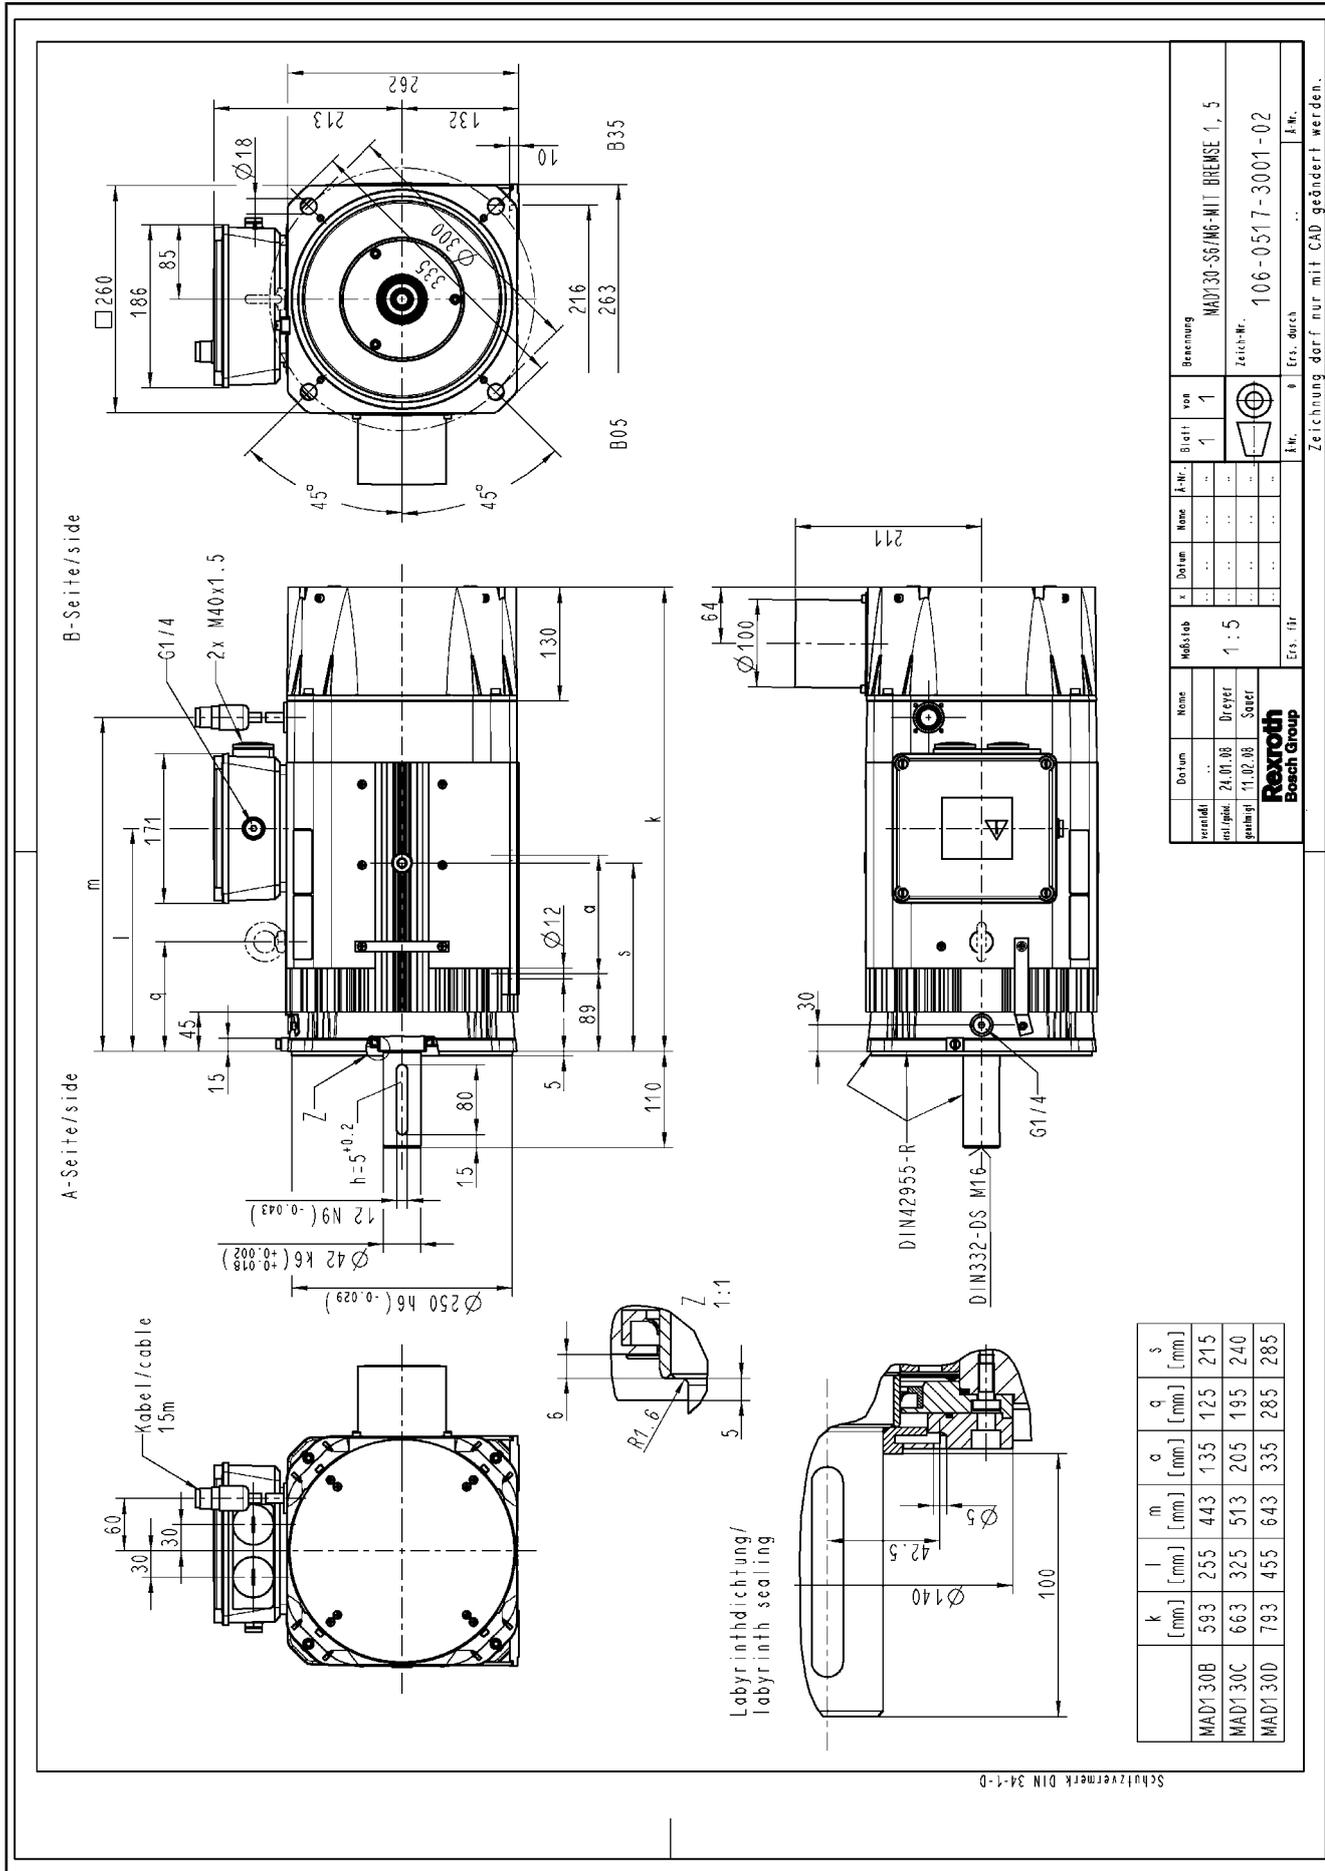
Dimension sheet MAD130 with encoder M6/S6, brake 1/5
